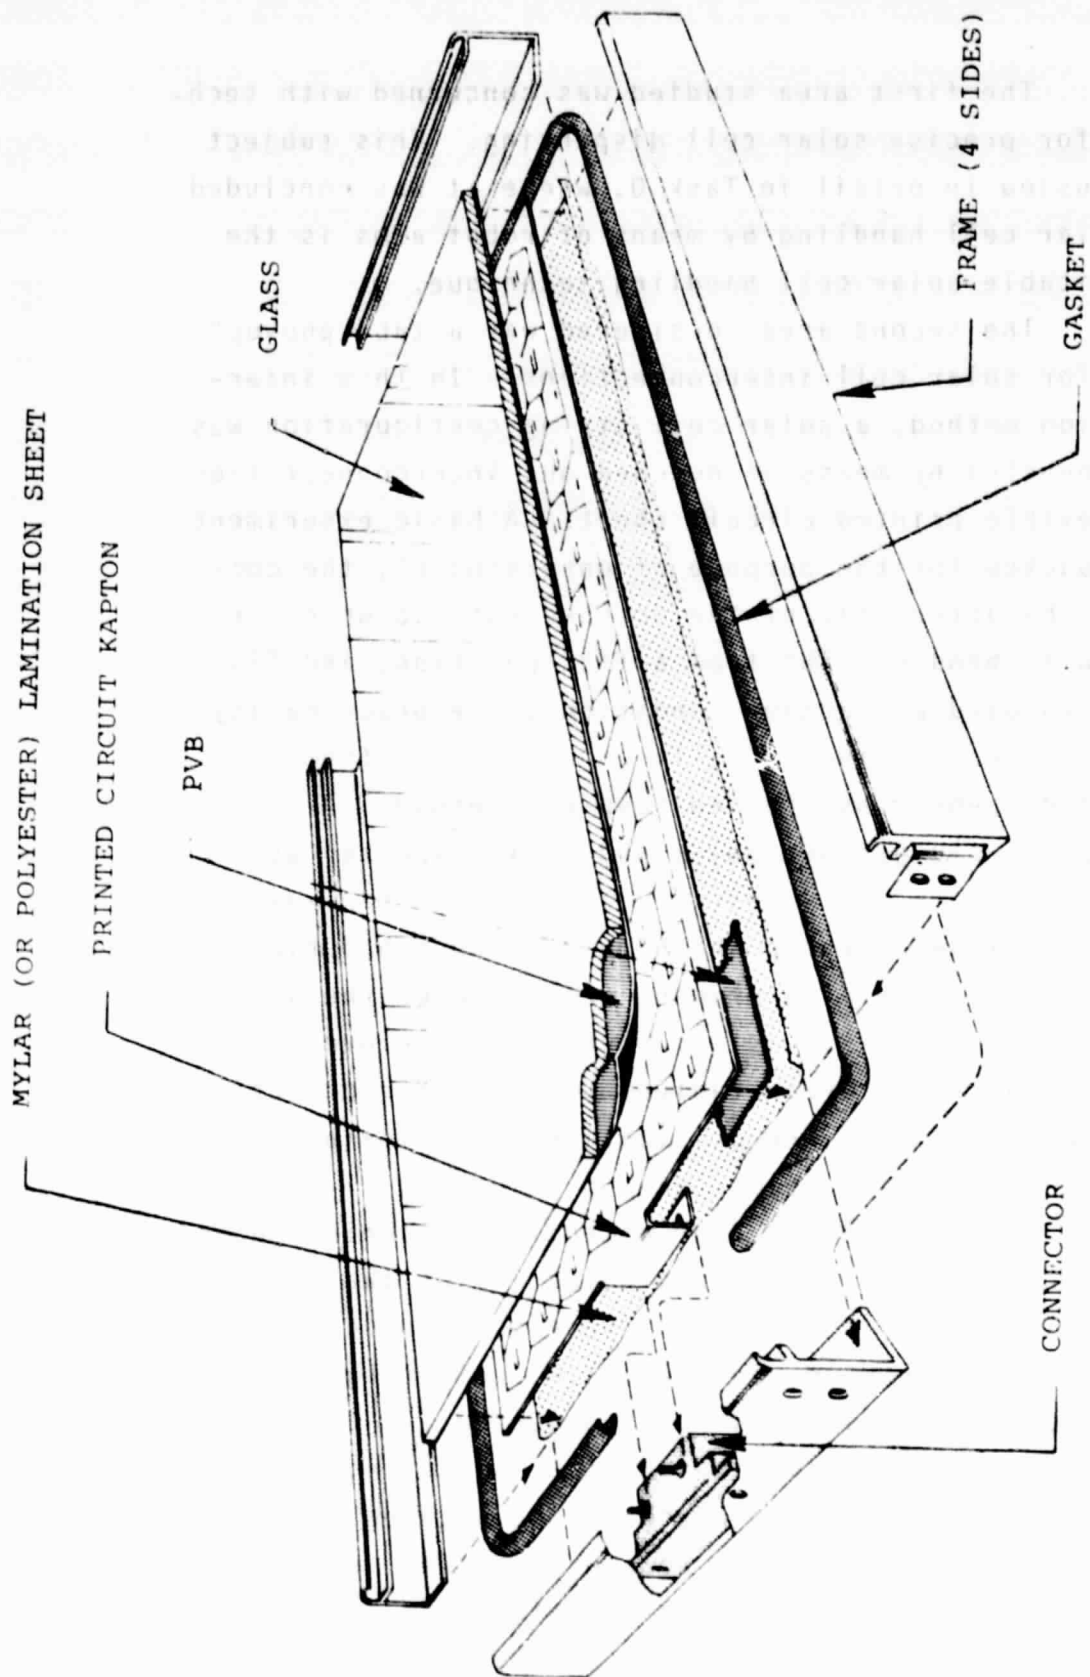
Exploded View of Hexagonal Solar Cell Module.
